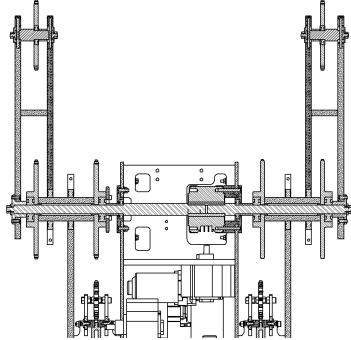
CAD modeling of internal mechanical parts. gears and important shafts are shown in this picture.
